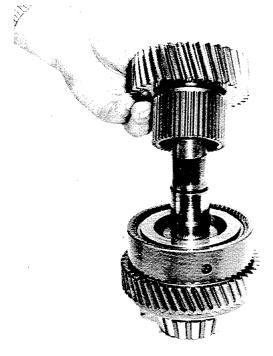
Removing or Installing the Front Thrust Bearing, Spacer and Washer from the Reverse Clutch Shaft.
